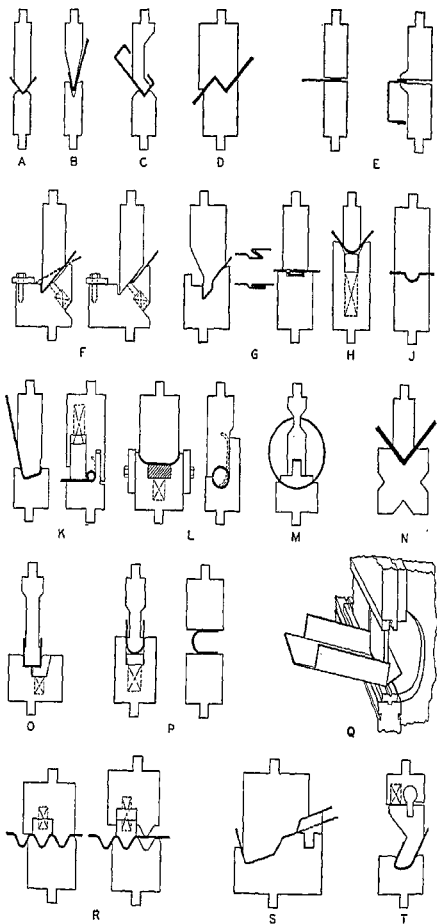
Typical press-brake bending and forming dies, derived or adapted from the Verson Allsteel Press Co. (A, F, G, H, J, L, M, O, P, R, S, T); Cincinnati Shaper Co. (B, D, N, Q); Dreis and Krump Mfg. Co. (E, K).^{1,*}
